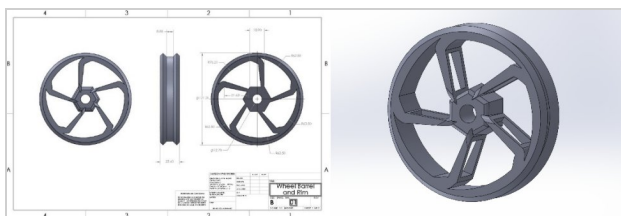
Custom wheel drawing. The spoked design keeps the wheel light while a tread adds grip.
